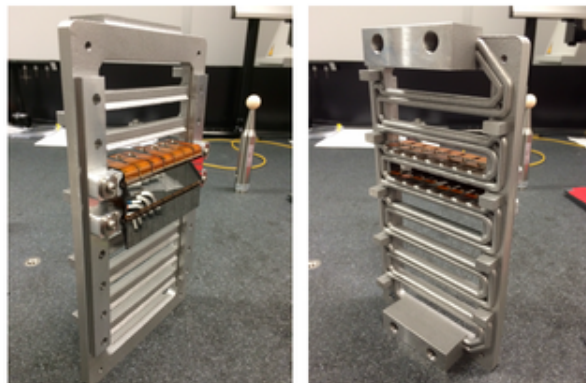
Assembling of the modules on the Aluminum frame, which also embeds the water cooling pipes.
